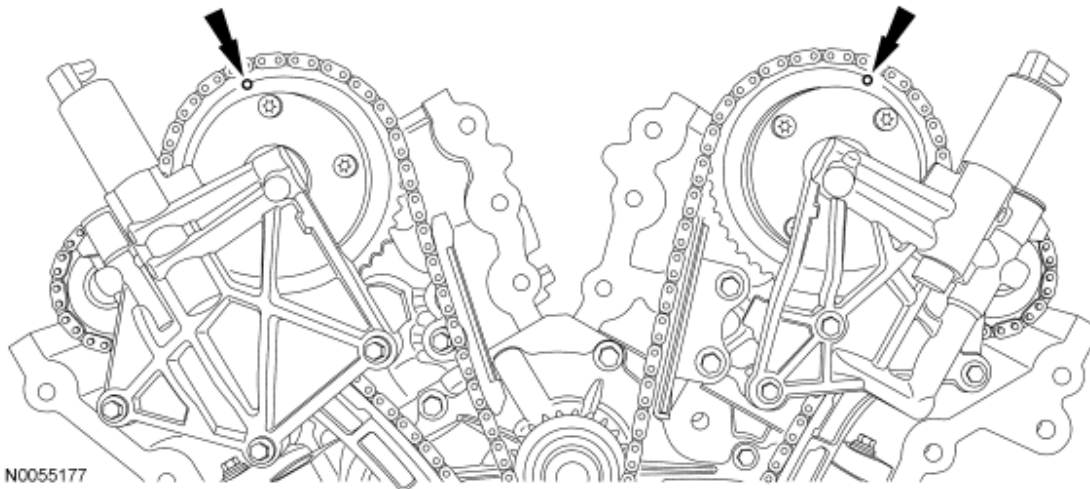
Aligning Timing Marks On Variable Camshaft Timing (VCT) Assemblies
